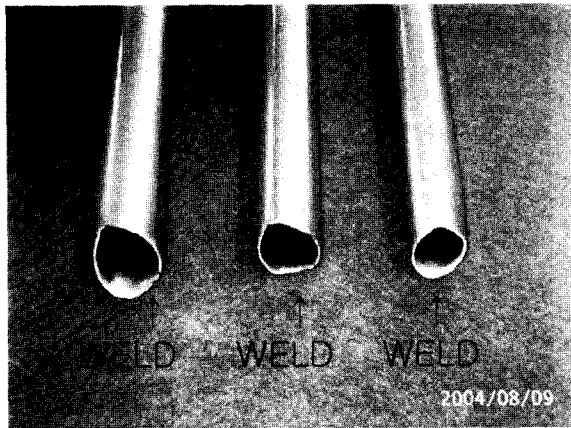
Fracture shape of tensile test specimen ( $\phi=25, 22, 20$  mm,  $t=1.3$  mm).
